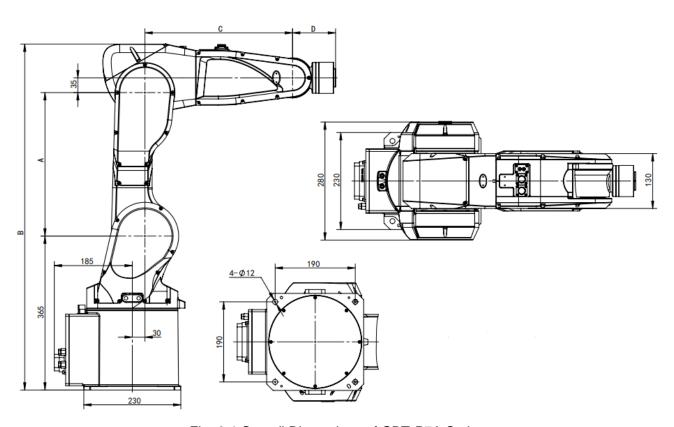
Overall Dimensions of GBT-P7A Series
